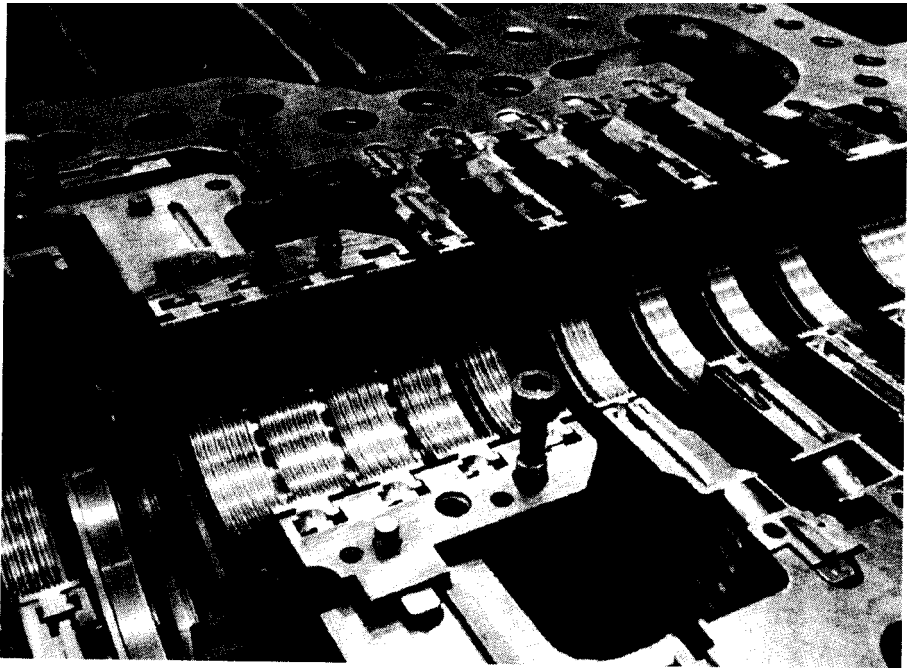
Modern labyrinth packing between HP turbine and reheat turbine in a common casing. Courtesy General Electric Company.
